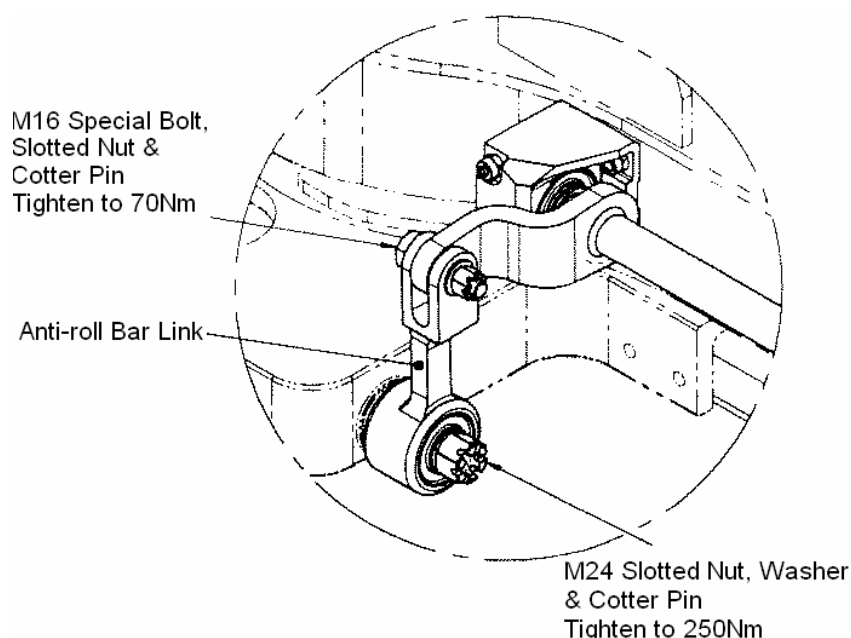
Assembly of Links to Improved Anti-roll Bar
